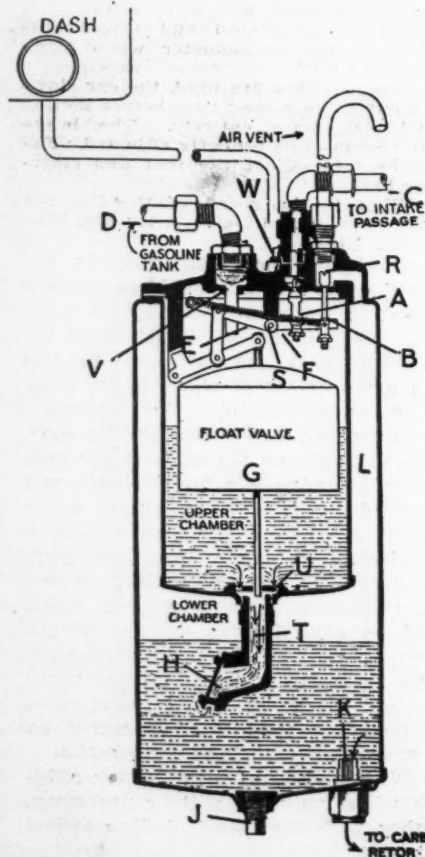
Cross section of Stewart vacuum tank showing connection for vacuum gage
